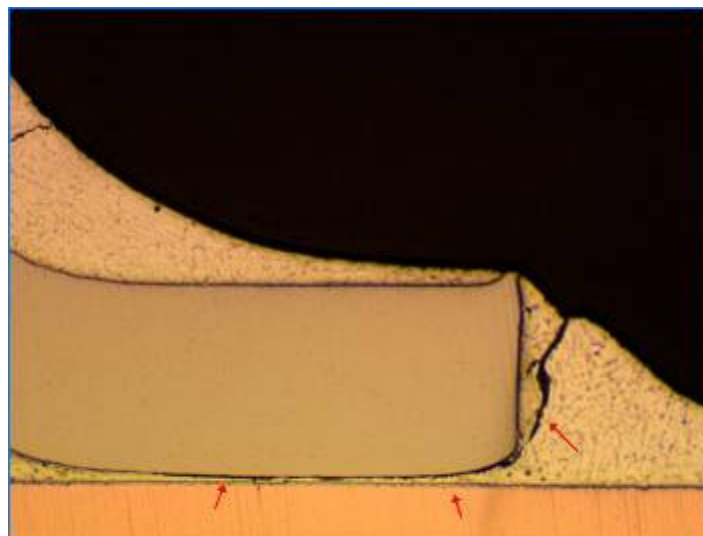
cross section, SN68, U29, right lead solder crack, 200xb
